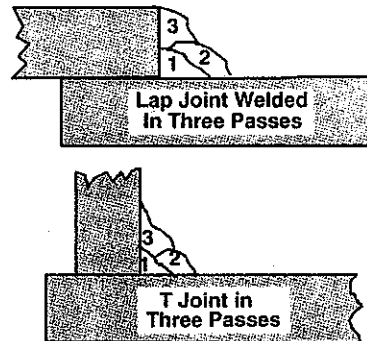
Triple Pass Lap and T Weld Joint
